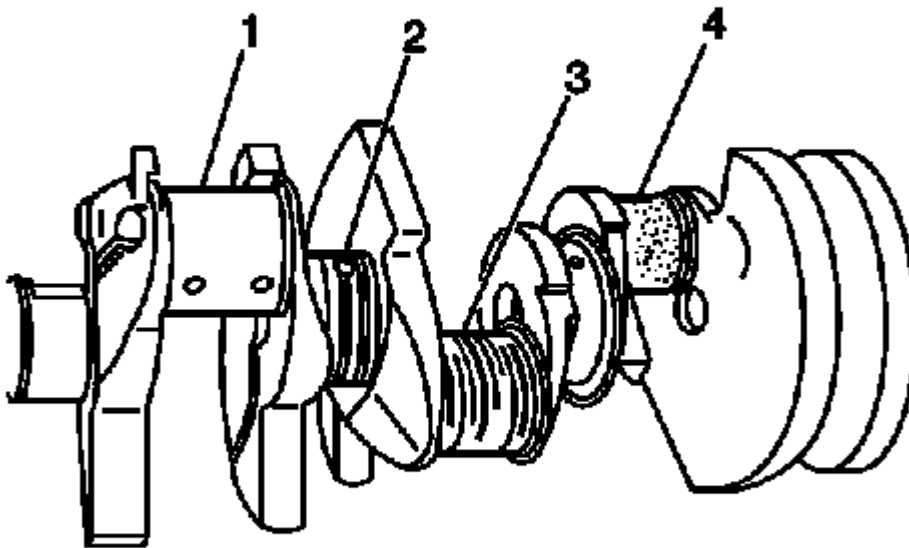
Identifying Different Crankshaft Journal Wear Patterns
